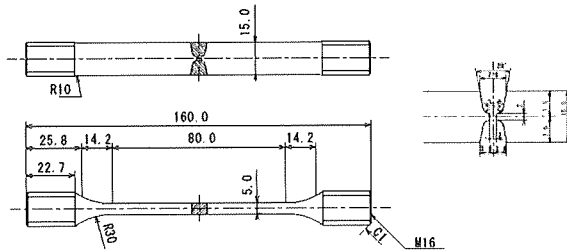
Shape and dimensions of welded specimen for SUS316FR
